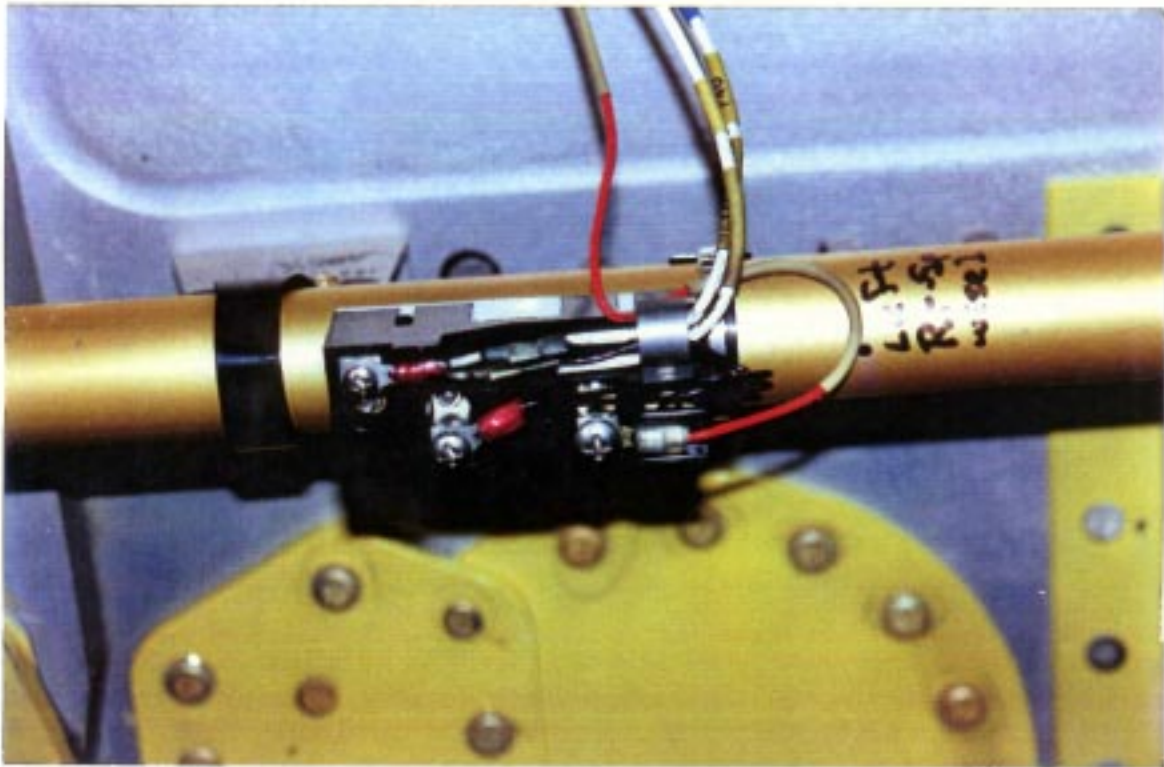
CWT FQIS probe from forward right corner of CWT of N91305, showing red wire under clamp
